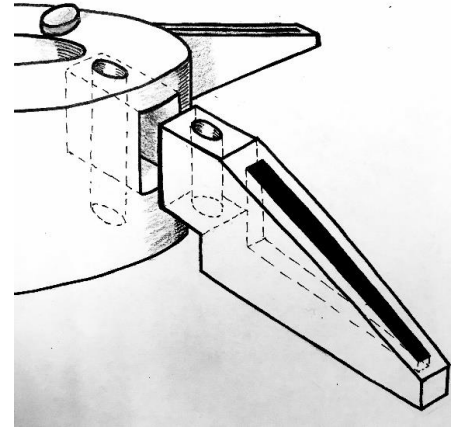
Wall Concept 4 – Cylindrical base with detachable, triangular feet.
